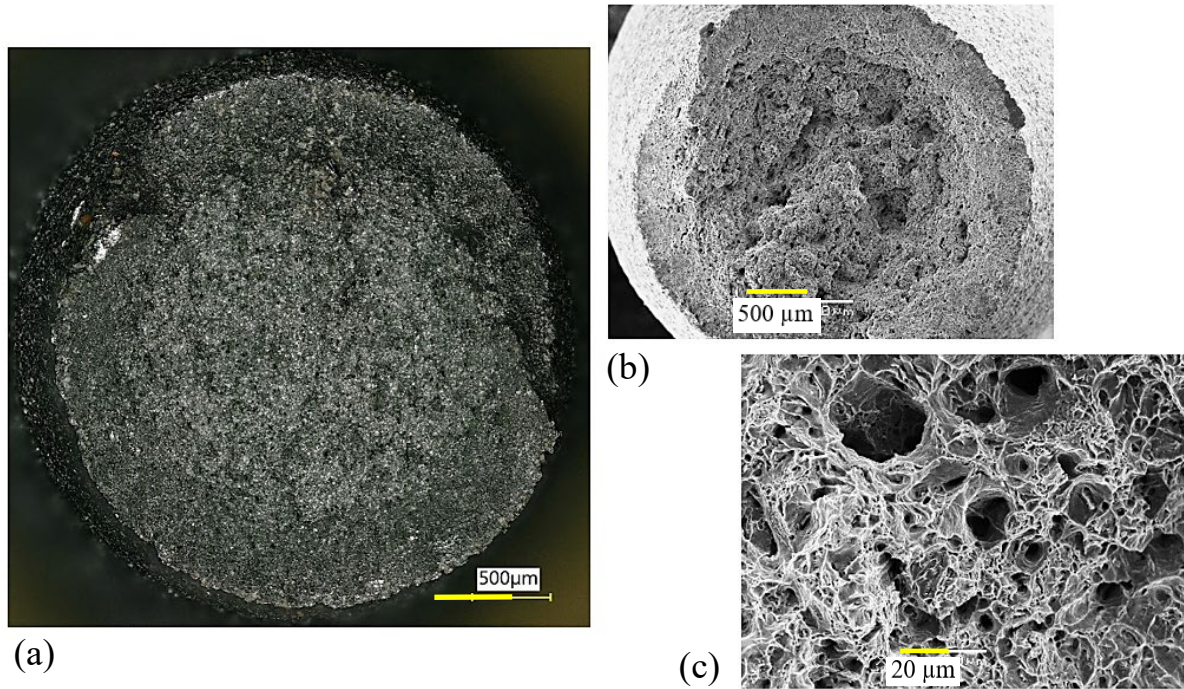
Specimen X-52 tested in air: (a) whole fracture surface, (b) visible shear lip, (c) transcrystalline ductile dimple fracture.
